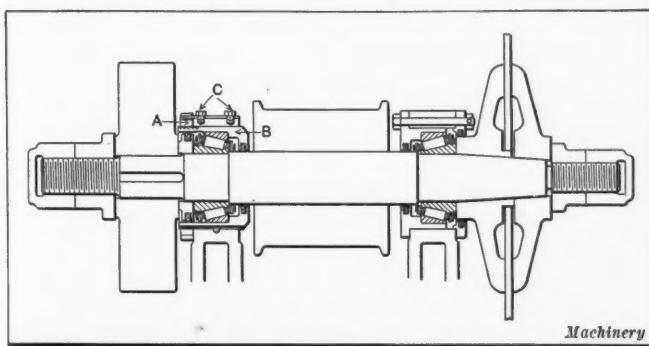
Hot Saw Spindle equipped with Adjustable Roller Bearings. The Application of Roller Bearings is made possible by the Tapered Form of Rollers and Raceways
